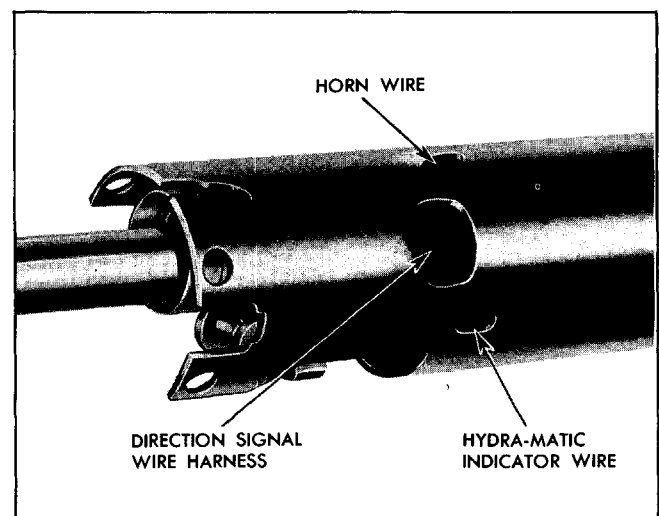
Openings for Wiring in Steering Column Jacket
